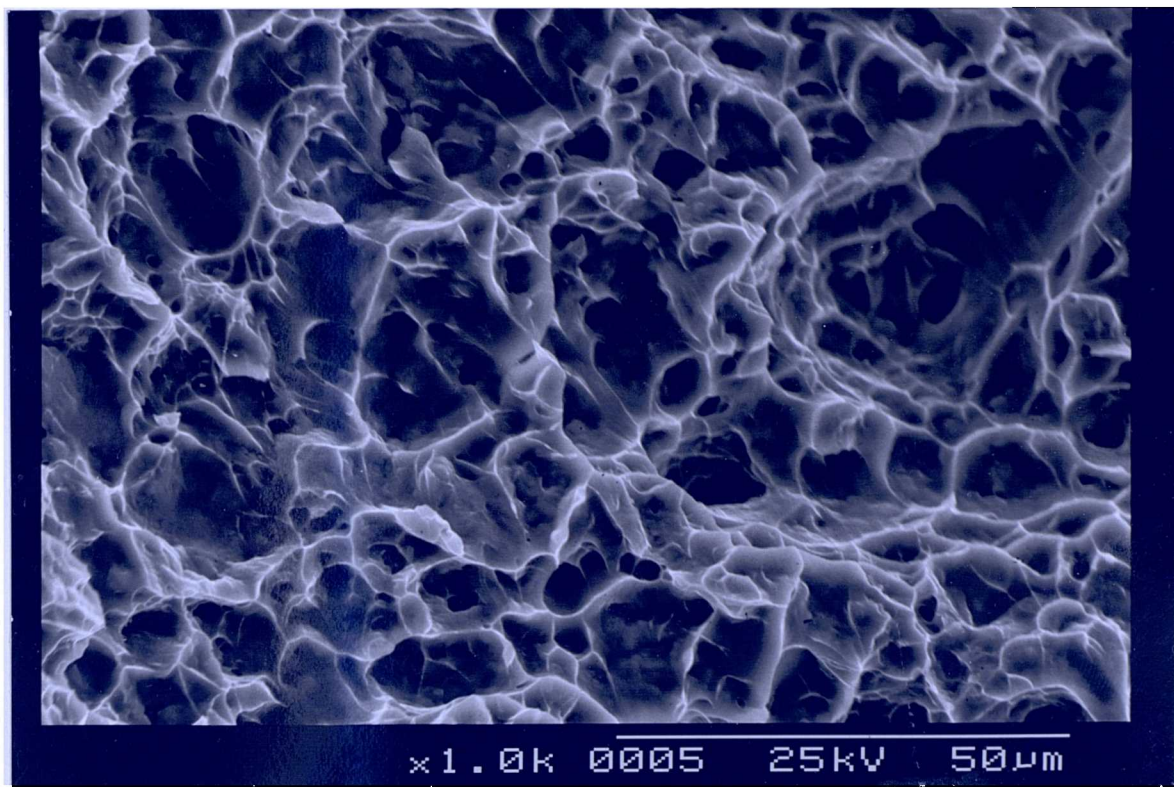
Fracture Surface Of Weak Weld (α : 0.92 mm, f = 100 Hz, P_{fr} : 50.2 MPa - experiment D17)
